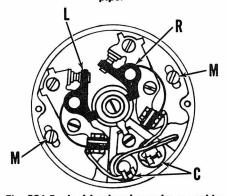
Ignition breaker point assembly (L) is for left cylinder, other points (R) are for right cylinder. The back plate assembly can be moved for timing after loosening the two mounting screws (M).
